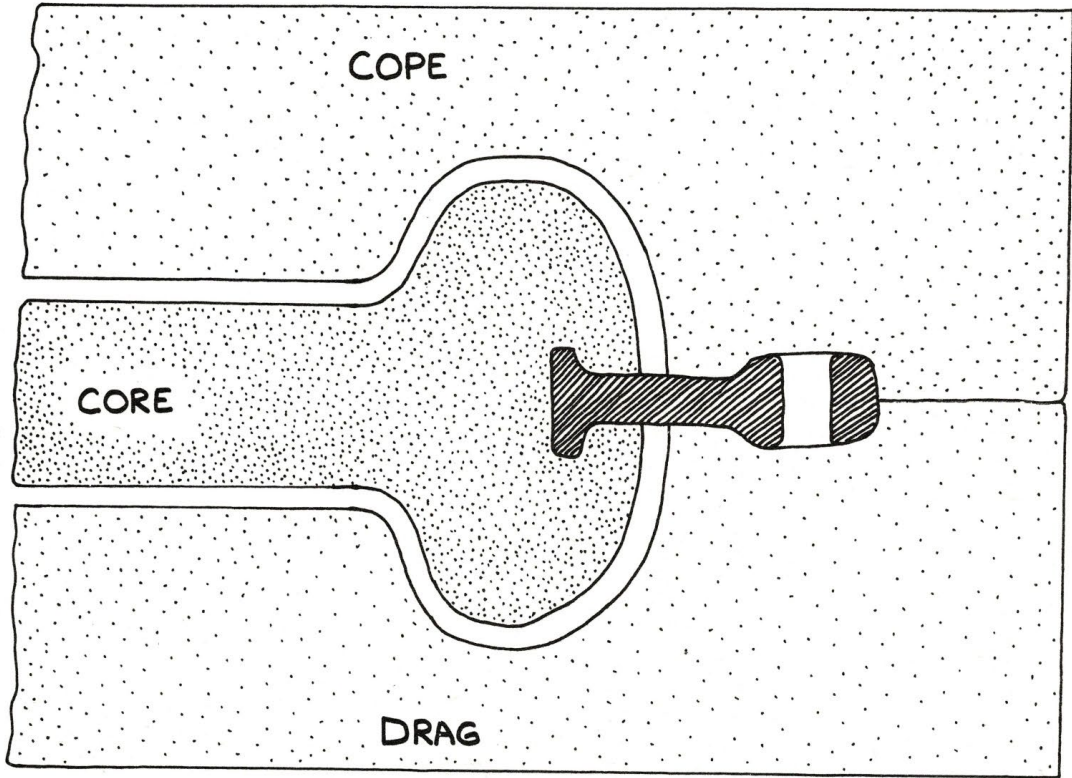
Assembly of a pre-cast mount prior to casting.
